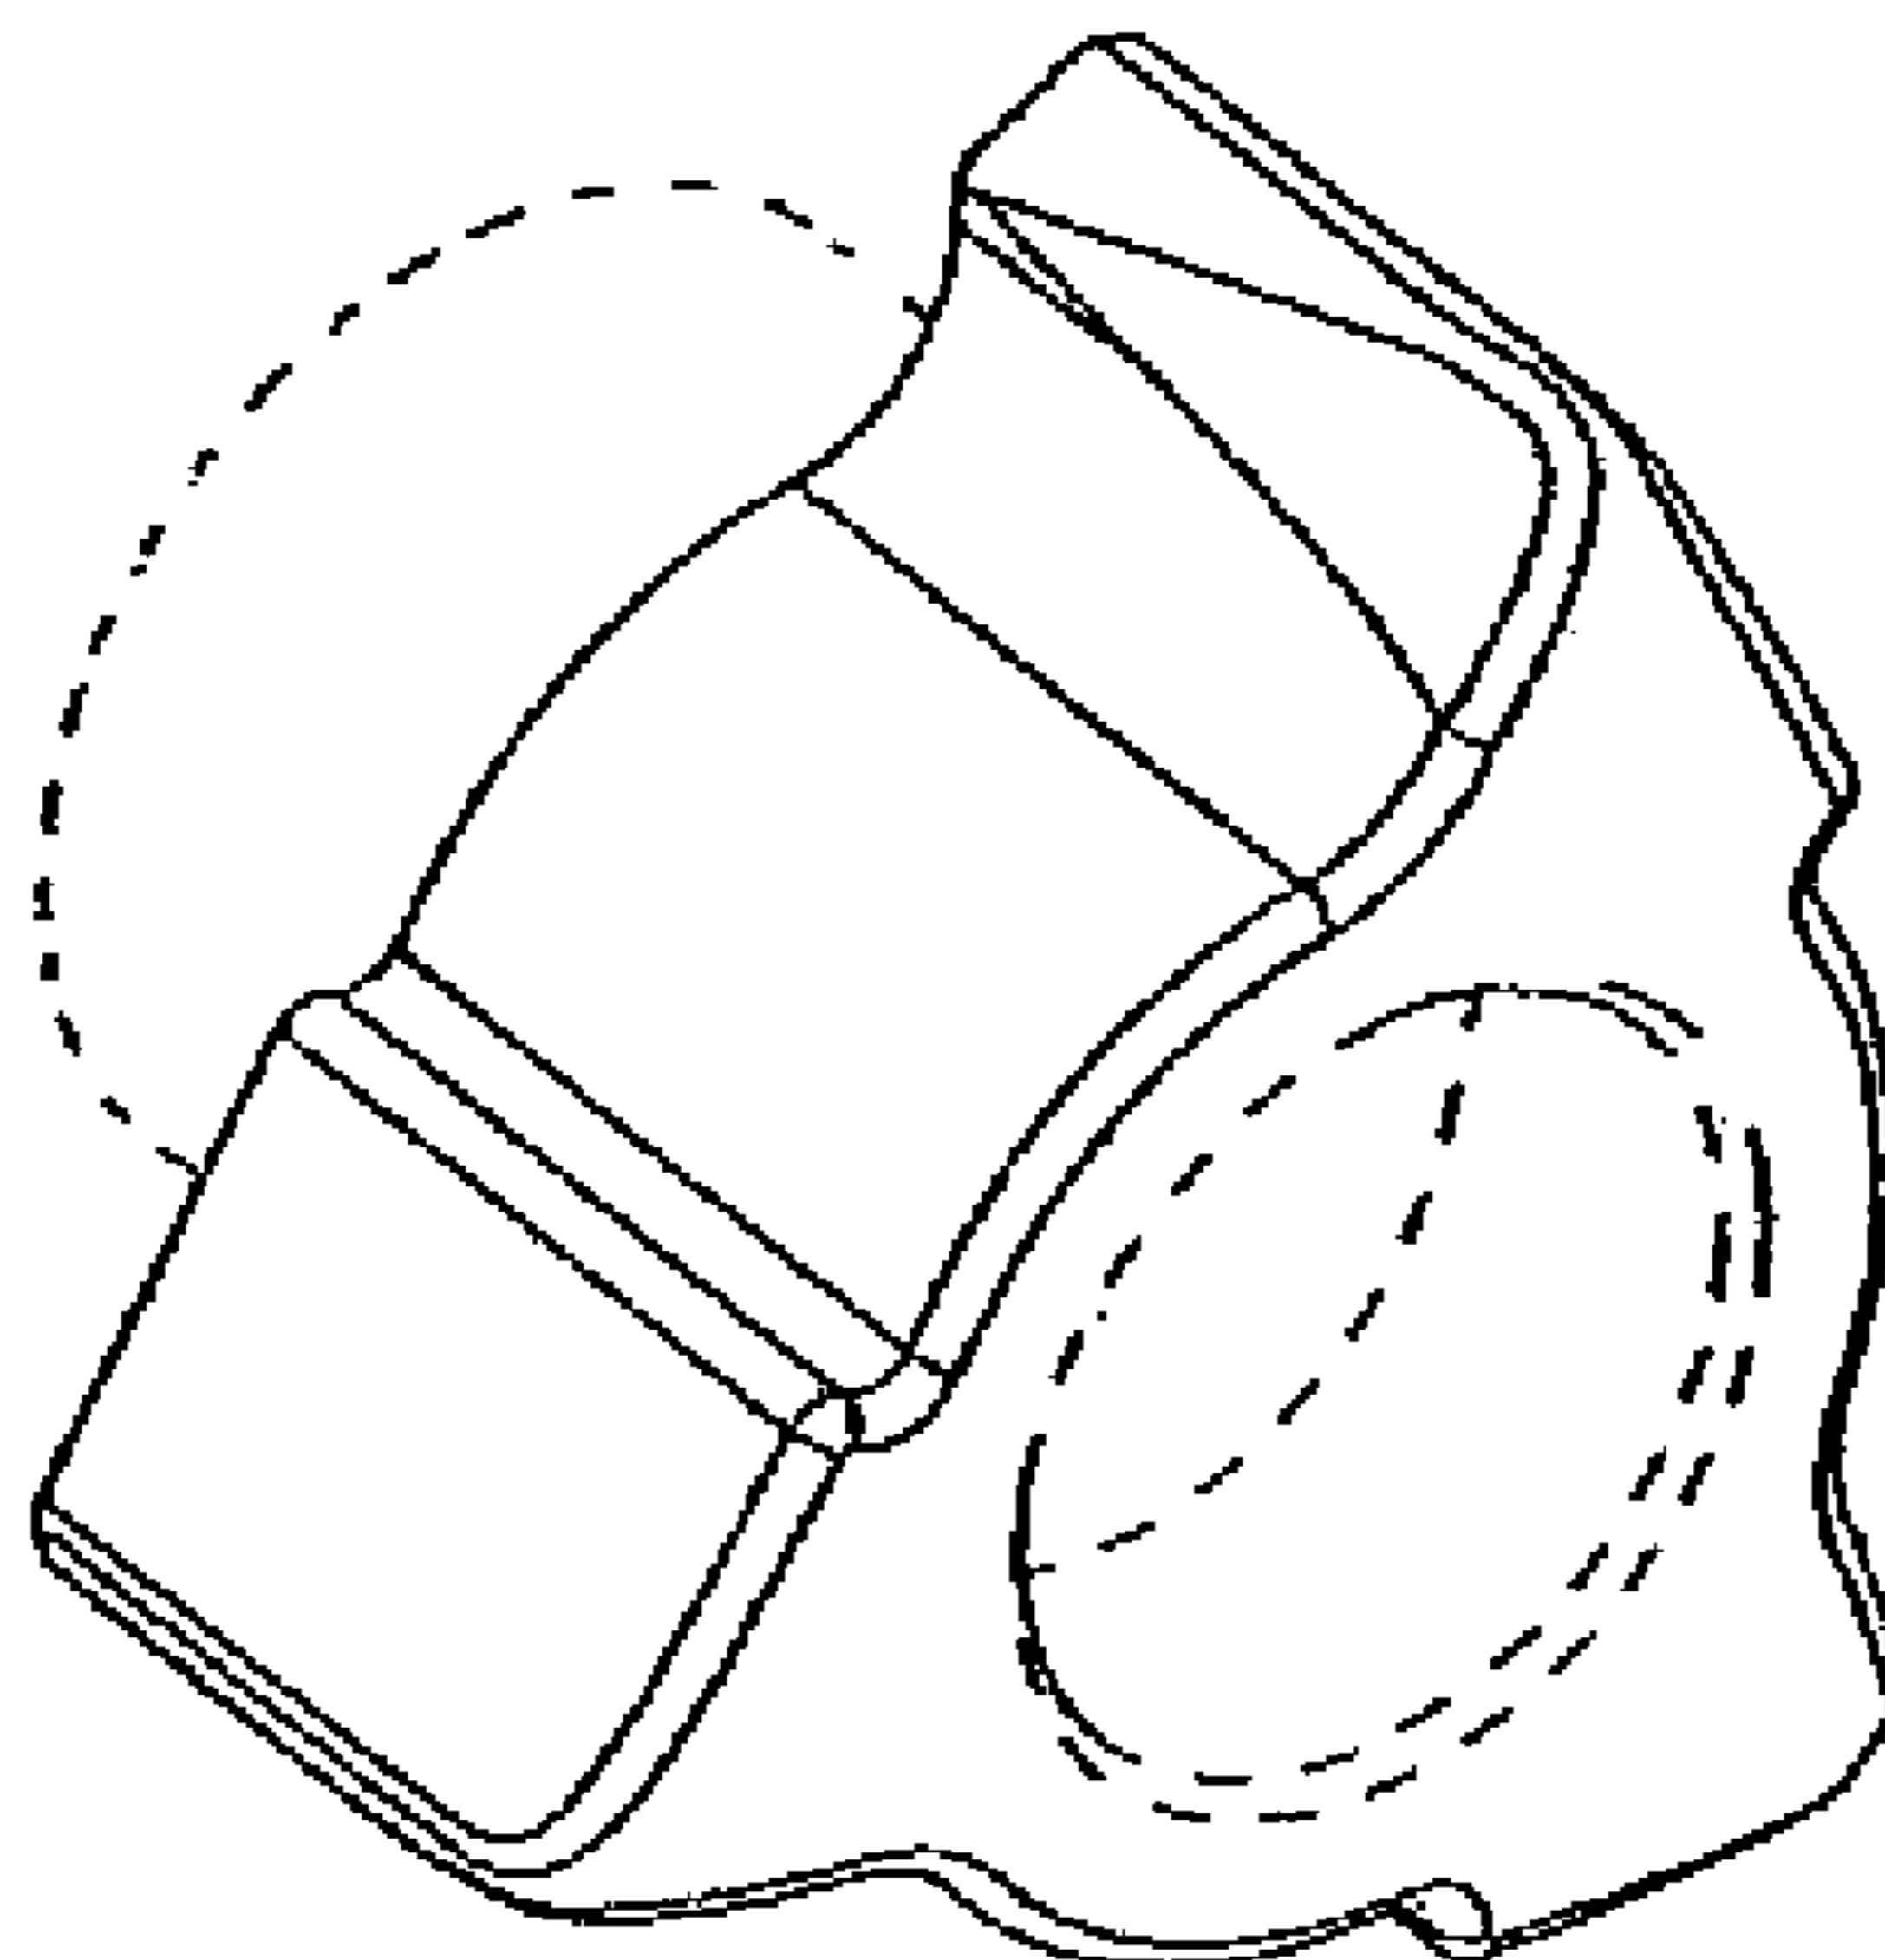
is a top elevated perspective view of the mechanical drive coupling of FIG. 1; and,
